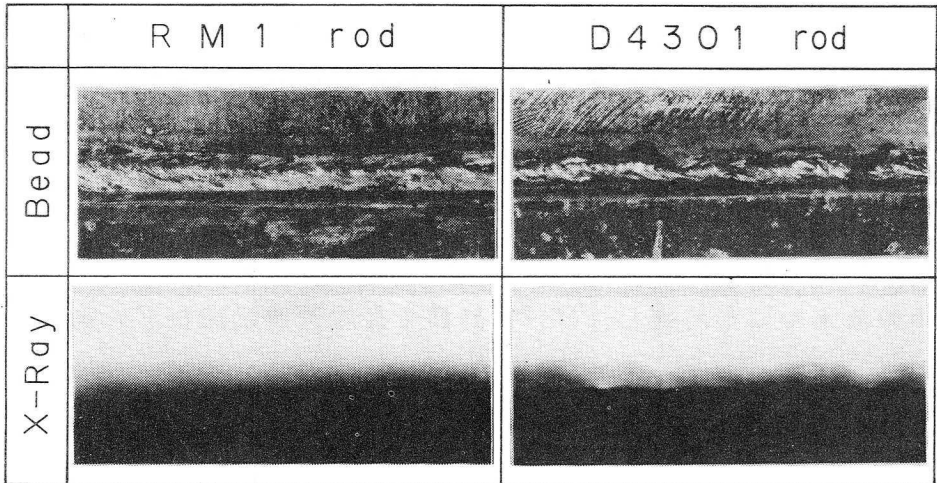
Appearance, bead and X-ray inspection of welds obtained sea water (About 7 m depth)
